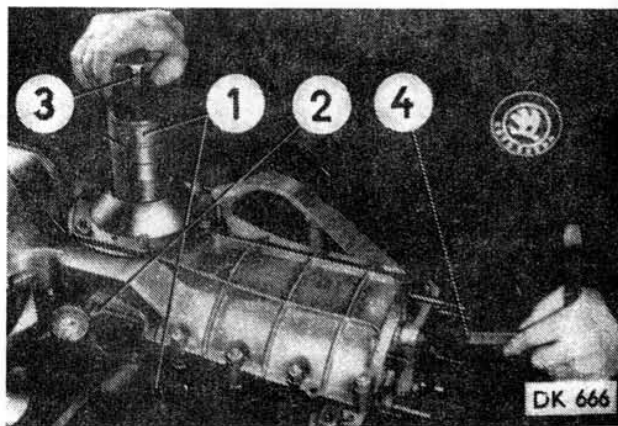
/1 - Adjusting Bevel Gear Backlash
